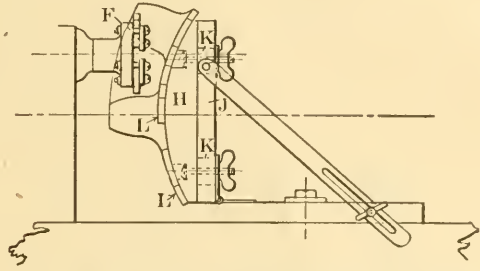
JIG FOR FORMING TOOTH PROFILE.
